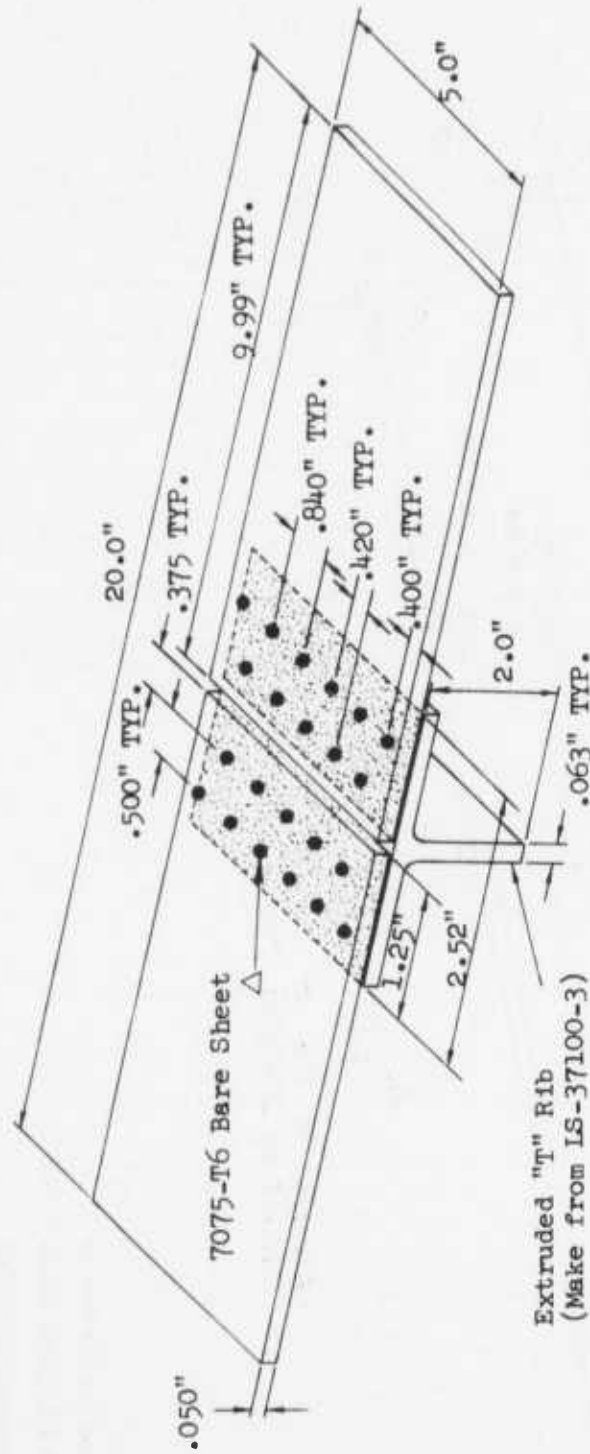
WELDBOND VIBRATORY FATIGUE SPECIMEN - CONFIGURATIONS 1 AND 1a
